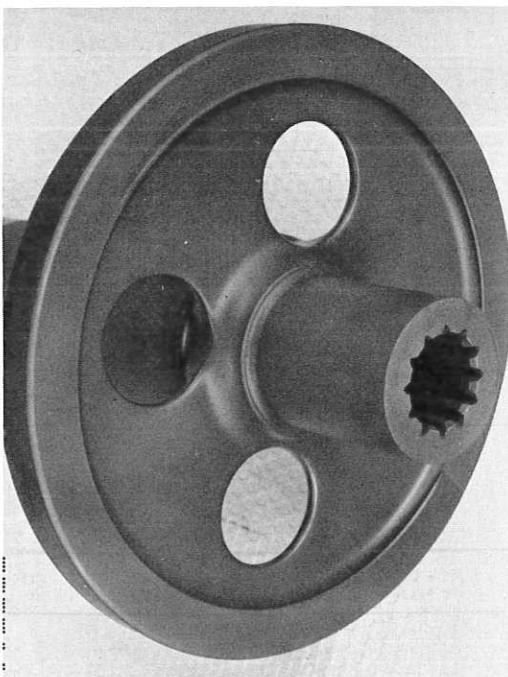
Gear blank showing lightening holes produced by the tooling in the previous illustration. ECM replaces both mechanical drilling and blending operation at a saving of \$8 per piece. (Courtesy of the General Electric Company.)
